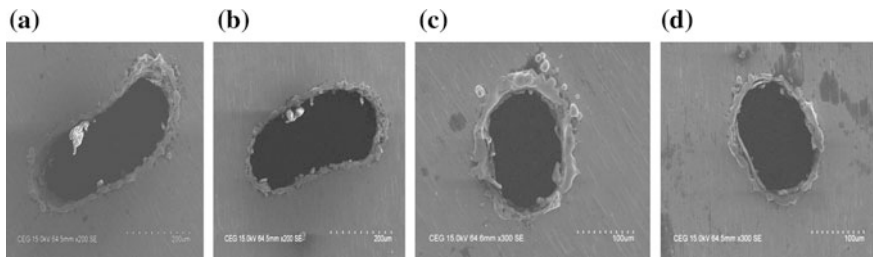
Machined hole at entrance and exit surfaces for best and worst settings
